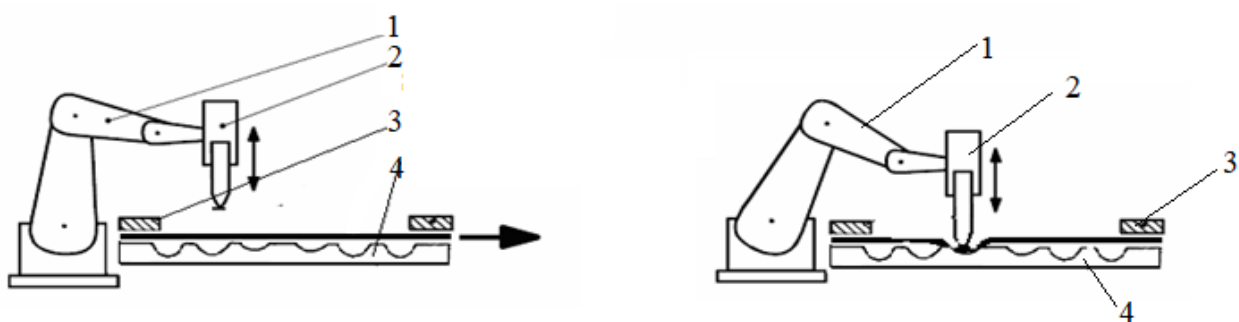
The hammer blow performed by an industrial robot, [14]: 1 – industrial robot; 2 – semi-finished tool; 3 – clamping device; 4 – support frame
